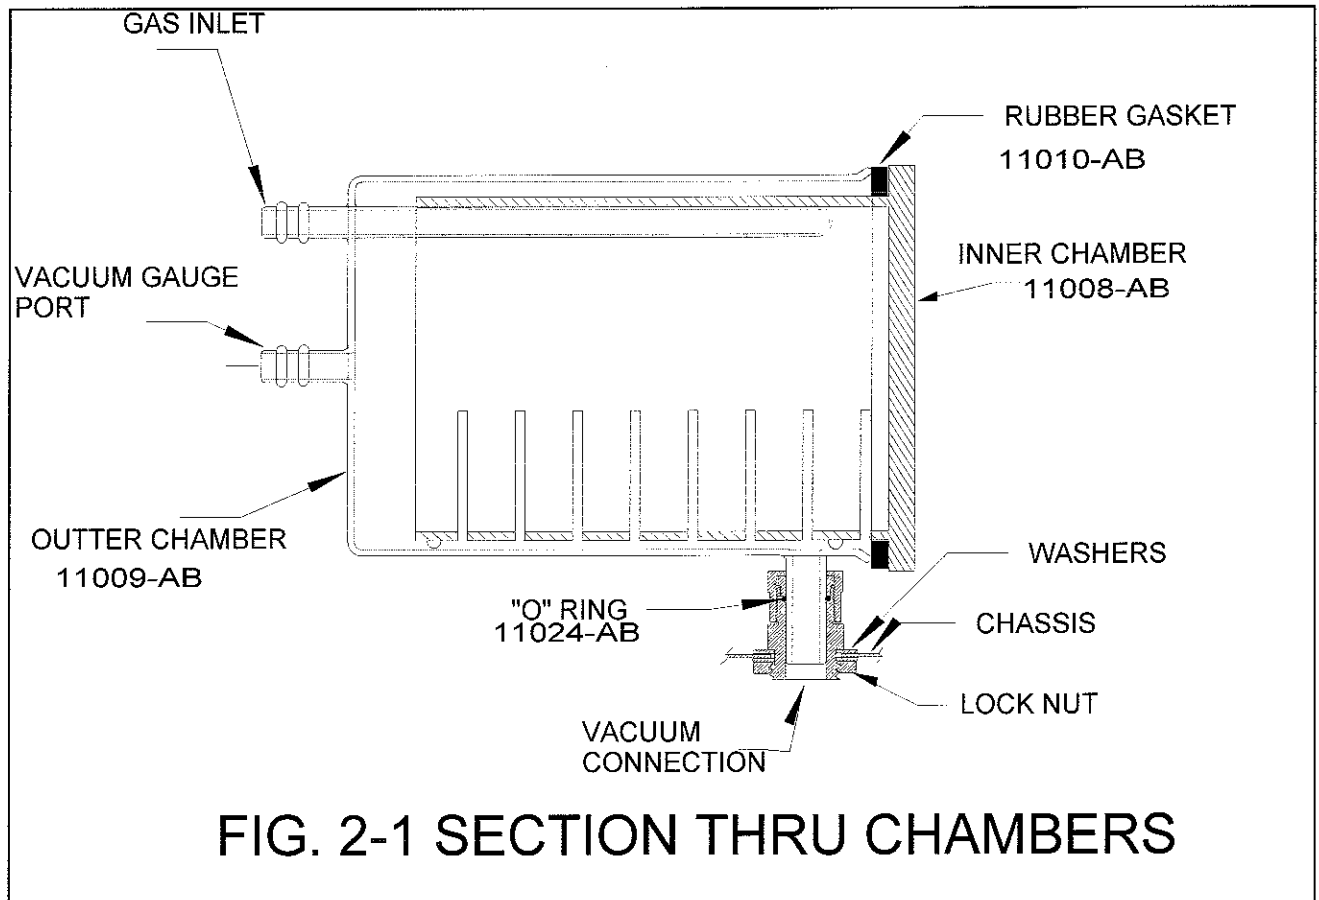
Connecting Outer Chamber to Vacuum Manifold
